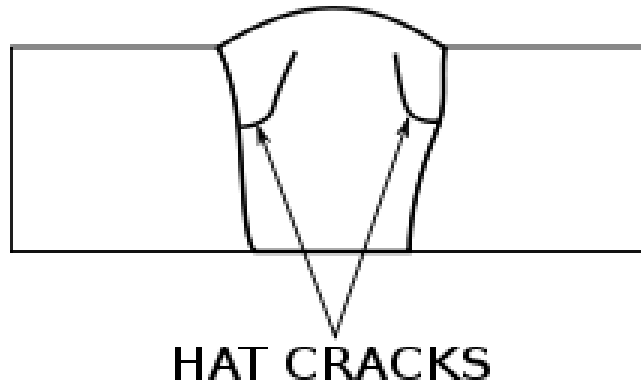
Cross-Section of Hat Weld (Roger, 2008)
